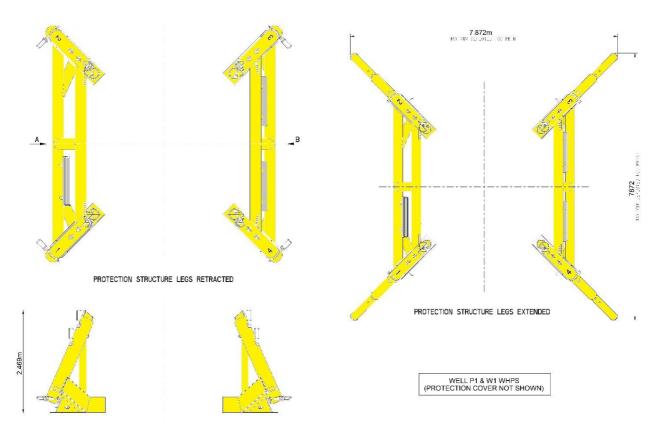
Plan view on WHPS for well P1 & W1 (protection cover not shown)
